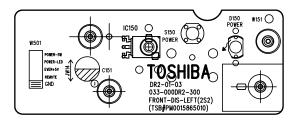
EU03B Front (L) PC Broad (Top side)
